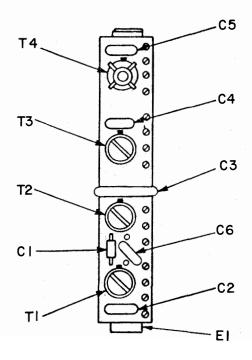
3 MHz Subassembly A2A4A21, Component Locations
